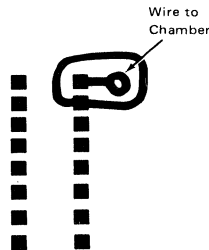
PC BOARD LAYOUT WITH GUARD AND IONIZATION PELLET
